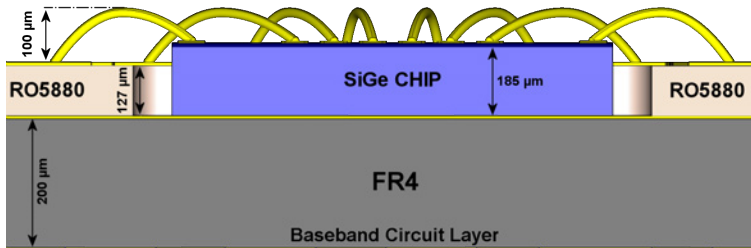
Side cut view of the SiGe Six-Port receiver chip in the cavity on the PCB.
